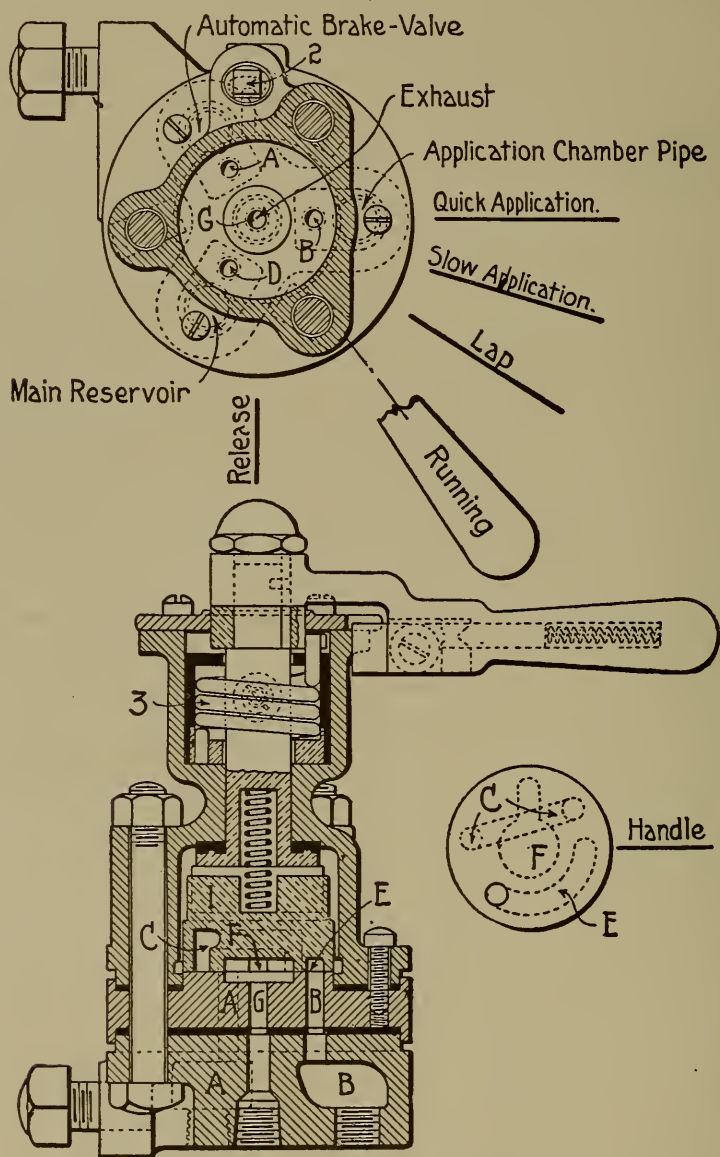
Sectional Views of Independent Brake-Valve. Upper view, a horizontal section through valve body, rotary valve removed. Lower view, a vertical section through entire valve. Plan view of rotary valve shown at right.
